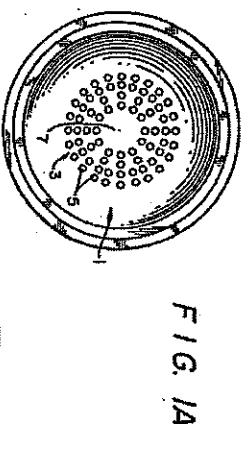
A is a plan view of a spincast mold which has a pattern of dots applied to its casting surface.
